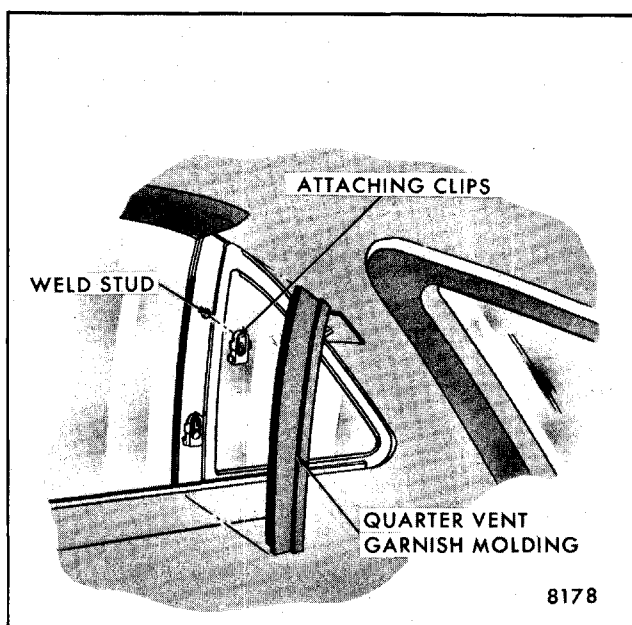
Quarter Vent Division Channel Garnish Molding "A-35" Styles
